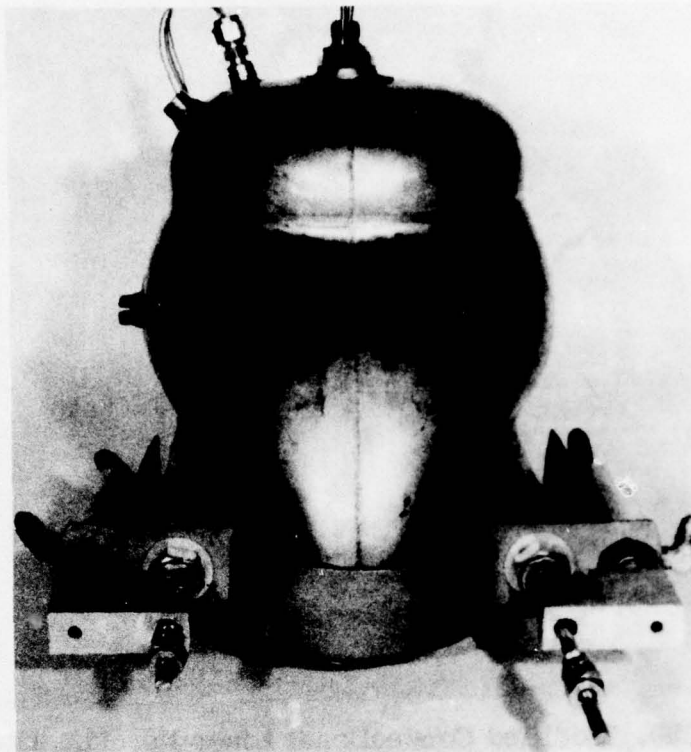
Modified Conventional Combustor Assembly, Side External View.
